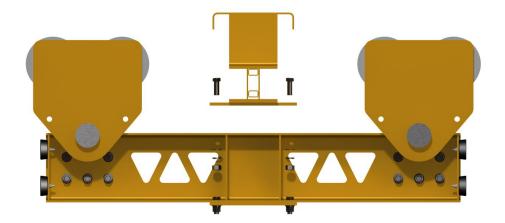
be sure to disconnect all electrical wires, and loosen the hardware that attached the endtruck to the bridge before removing the endtruck. Make sure you firmly tightening all fasteners for the endtruck assembly before lifting the bridge in the air and mounting it onto the runway sections.
